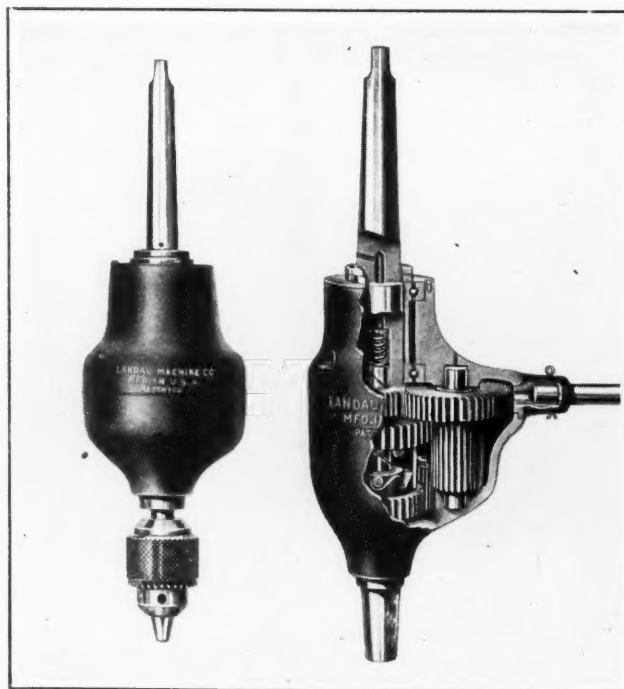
Models B and E Tapping Chucks manufactured by the Landau Machine & Drill Press Co.
